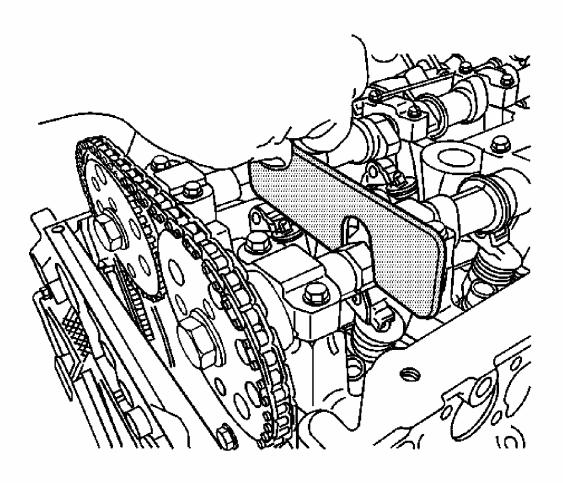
Using Camshaft Holding Tool Courtesy of GENERAL MOTORS CORP.
